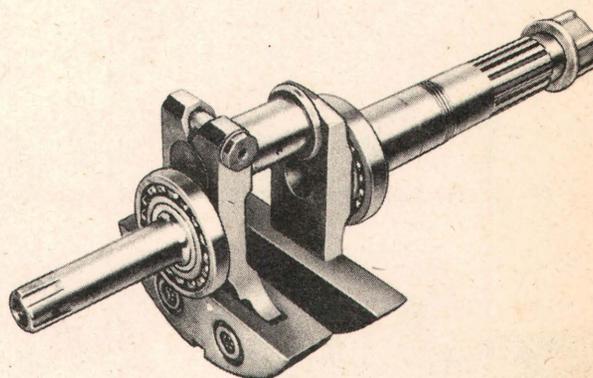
Crankshaft Assembly Part No. A5891 with Seventh Order Torsional Vibration Damper—Showing Front and Rear Main Bearings and Propeller Thread Protection Cap
